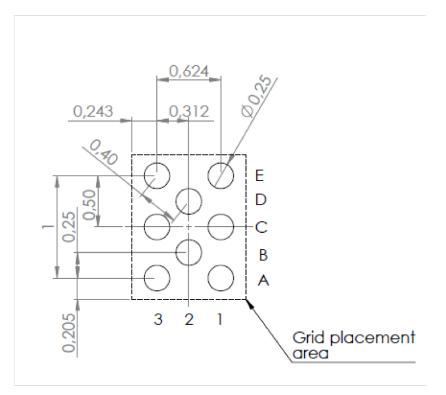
Flip-Chip 8 (1.14x1.44 mm) package outline
